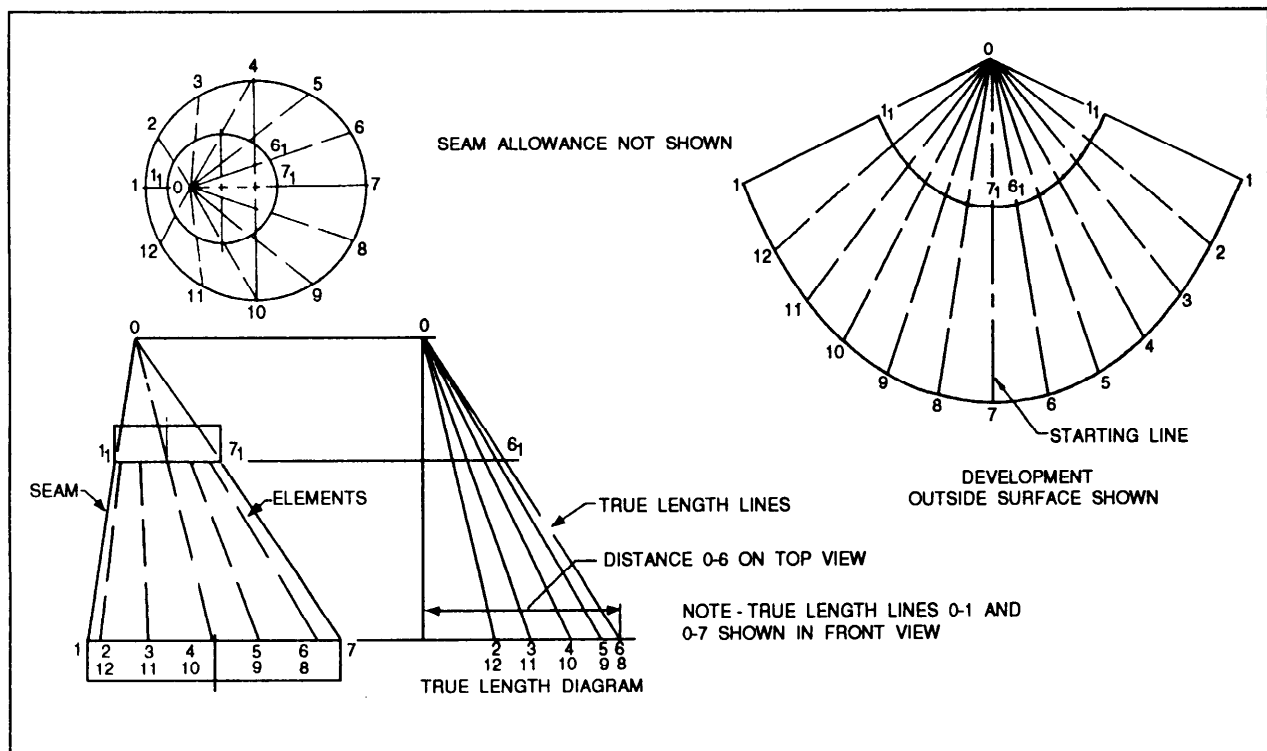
Transition piece connecting two circular pipes—parallel joints
